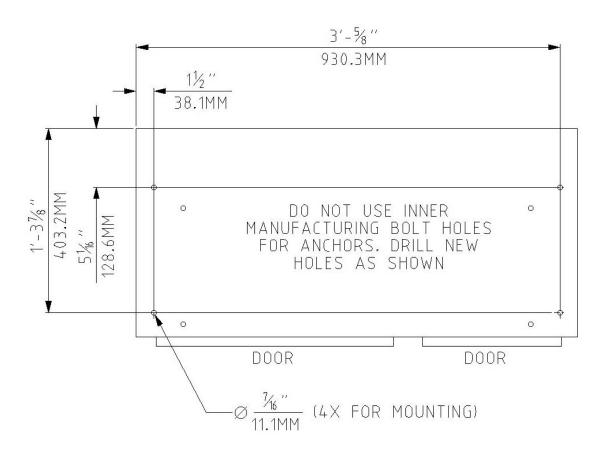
Mounting Hole Locations 3 Cylinder Cabinet or 3 Cylinder Euro Cabinet
